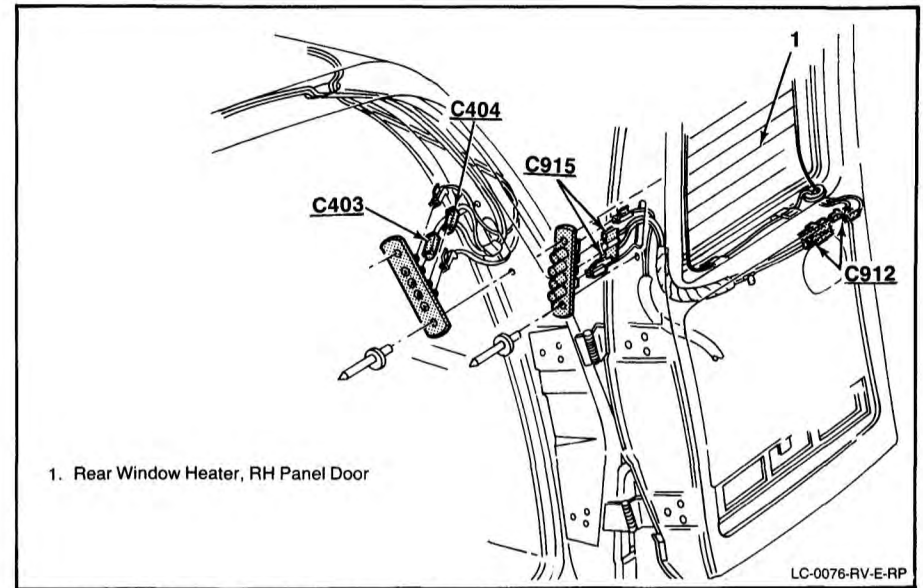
Rear Window Defogger Wiring—Panel Door Model
